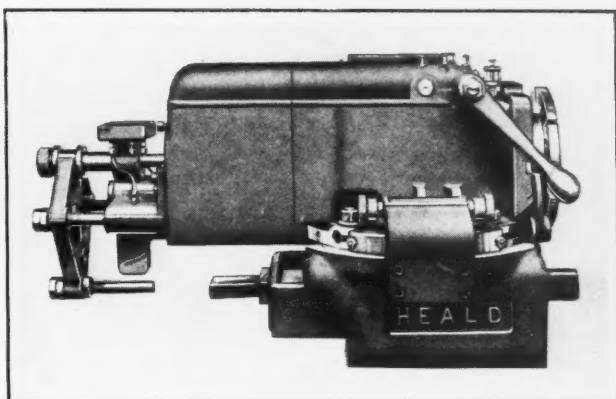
Close-up View of Work-head and Size-gage Mechanism
